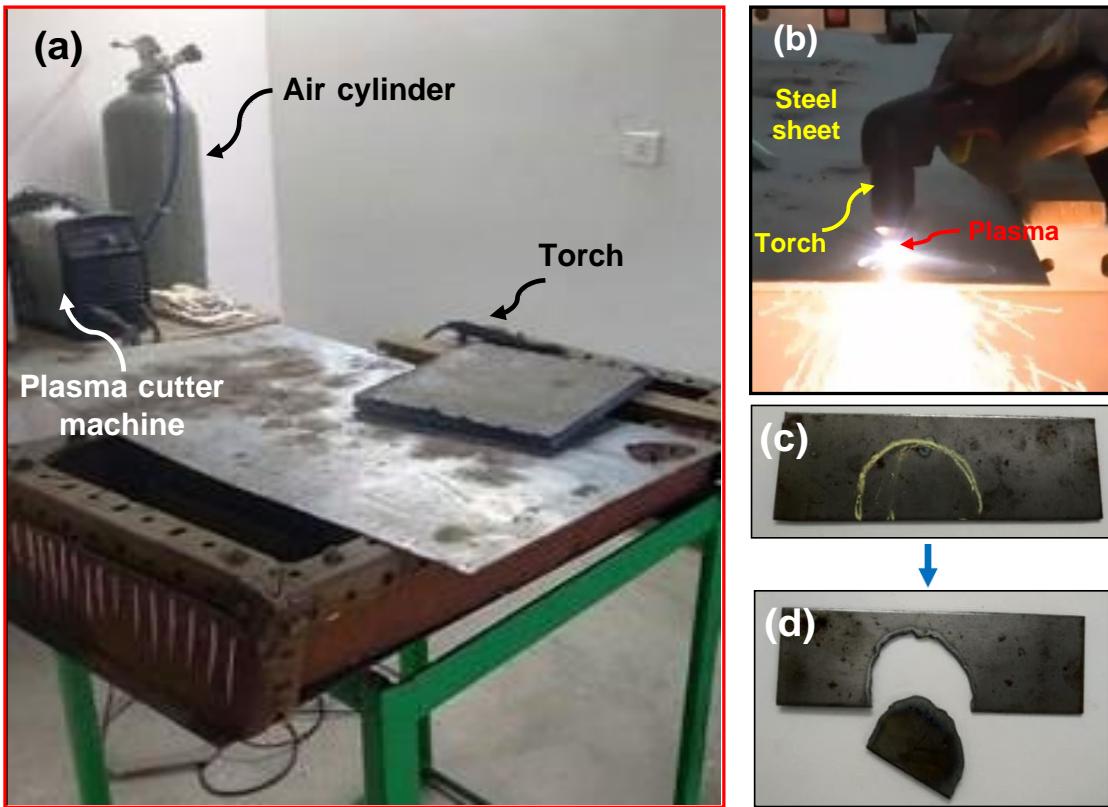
Plasma cutting (a) setup and (b) process. (c) and (d) are sheets before and after plasma cutting.
